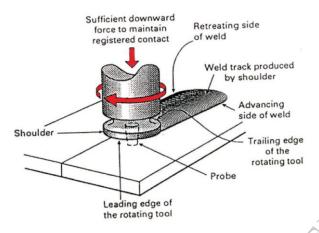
Schematic illustration of Friction Stir Welding
